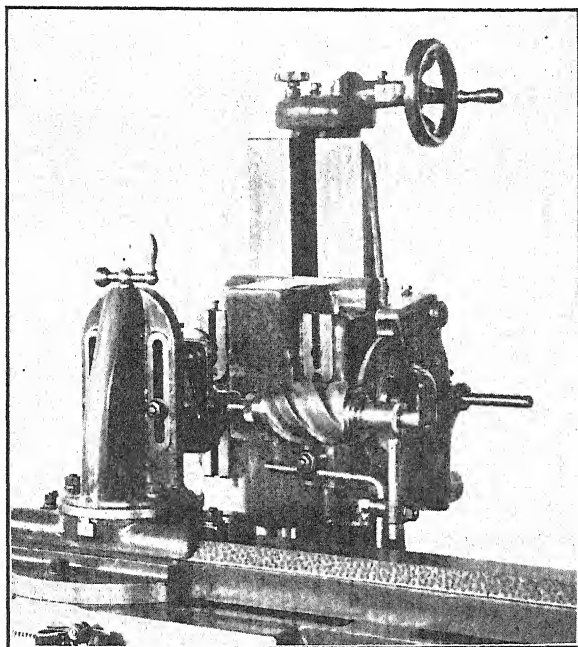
A Setup for Grinding a Relief on the Land of a Three-Tooth Helical Mill on the Brown and Sharpe Tool Grinder.
